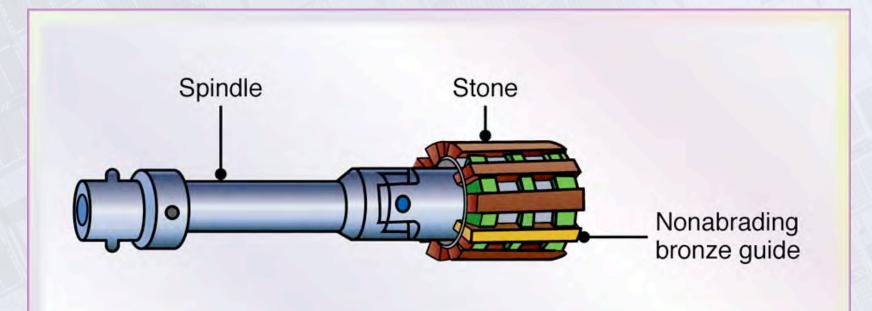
Schematic illustration of a honing tool used to improve the surface finish of bored or ground holes.
